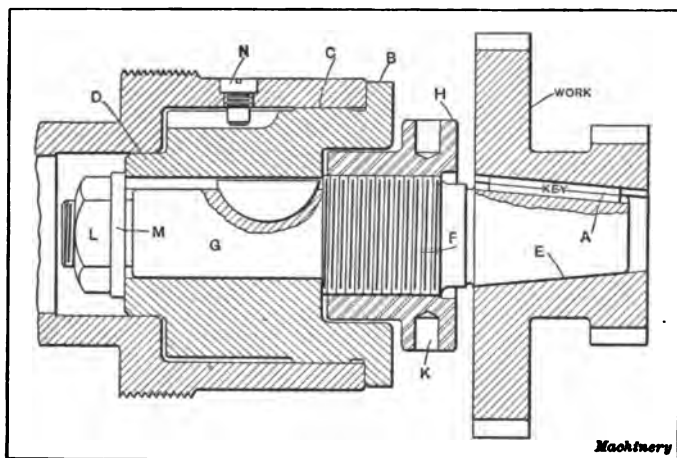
Arbor held in Collet and expanded by Internal Taper Plug
